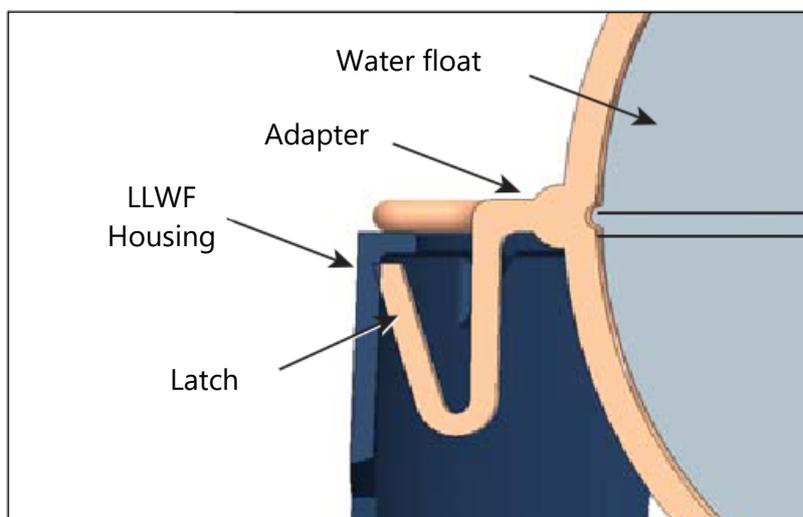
Correct Adapter Latch Position Under LLWF Housing Flange
